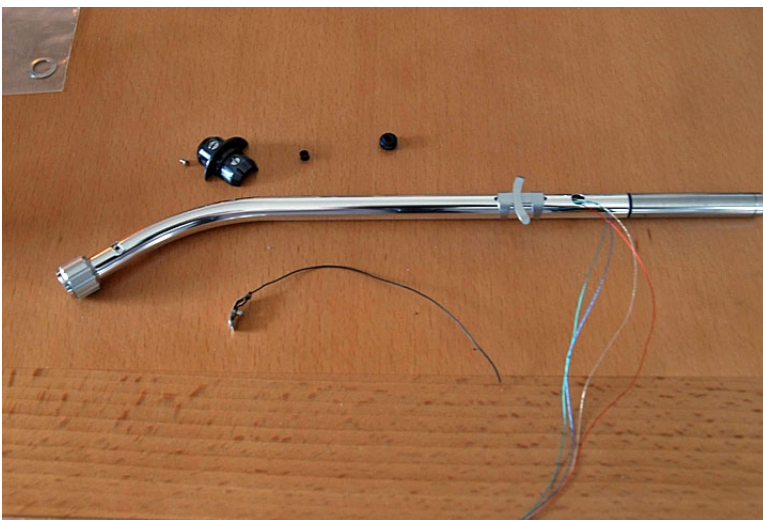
Tonearm tube and rear stub re-assembled with new coupling rubbers.
